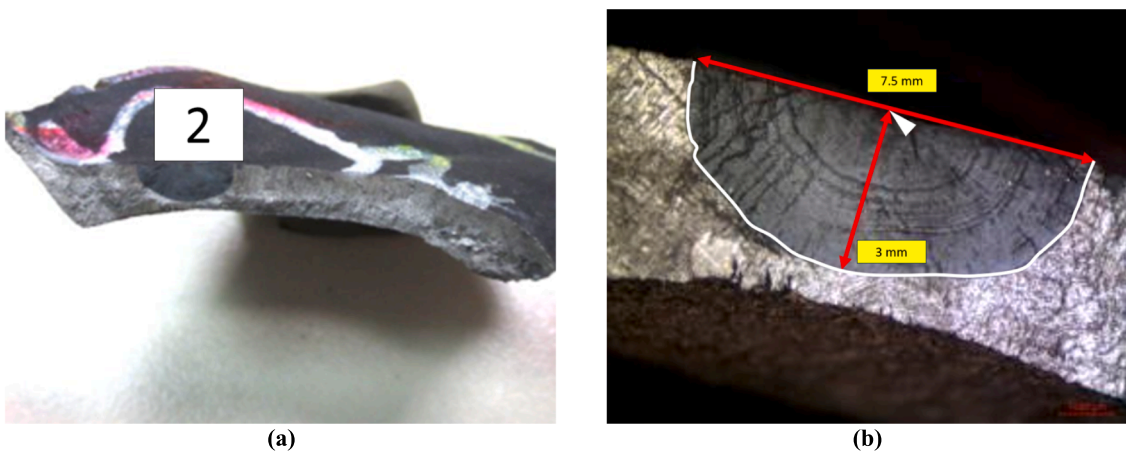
Engine C1 - Crack 2 on the left-hand side exhaust manifold.
